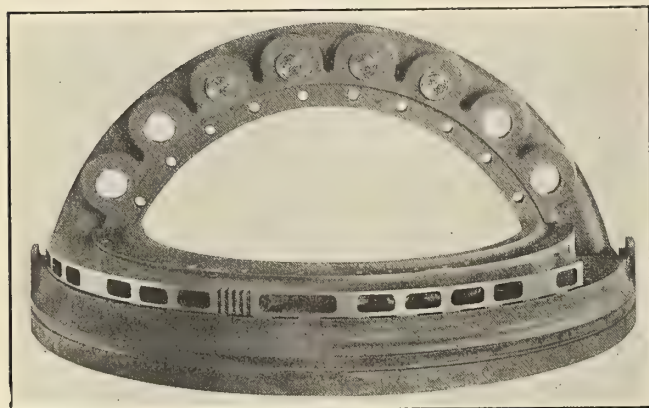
Nozzle Block and Sliding Valve, Partly Assembled
